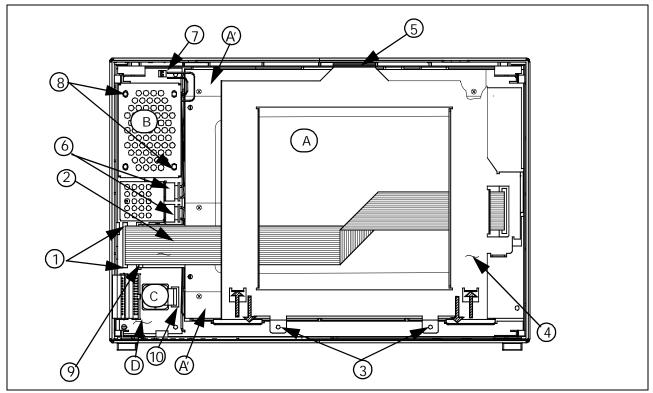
Front Panel Subassembly Layout - 10.4" LCD Display
